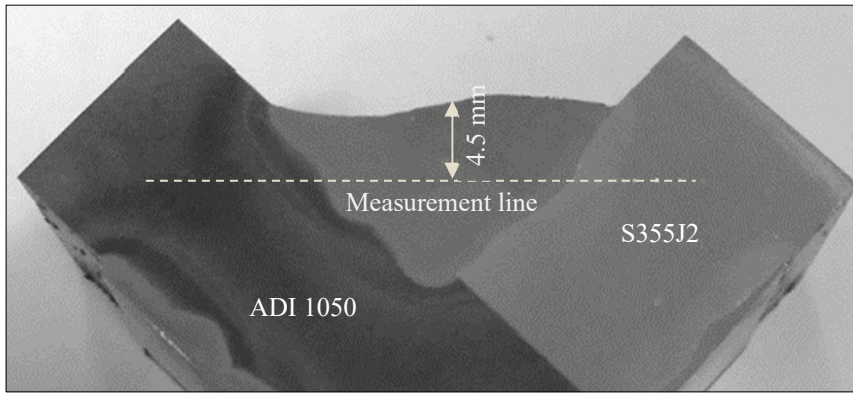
HV1 measurement on cross-section of a joint type C (cruciform nlc fillet-welded joint)
